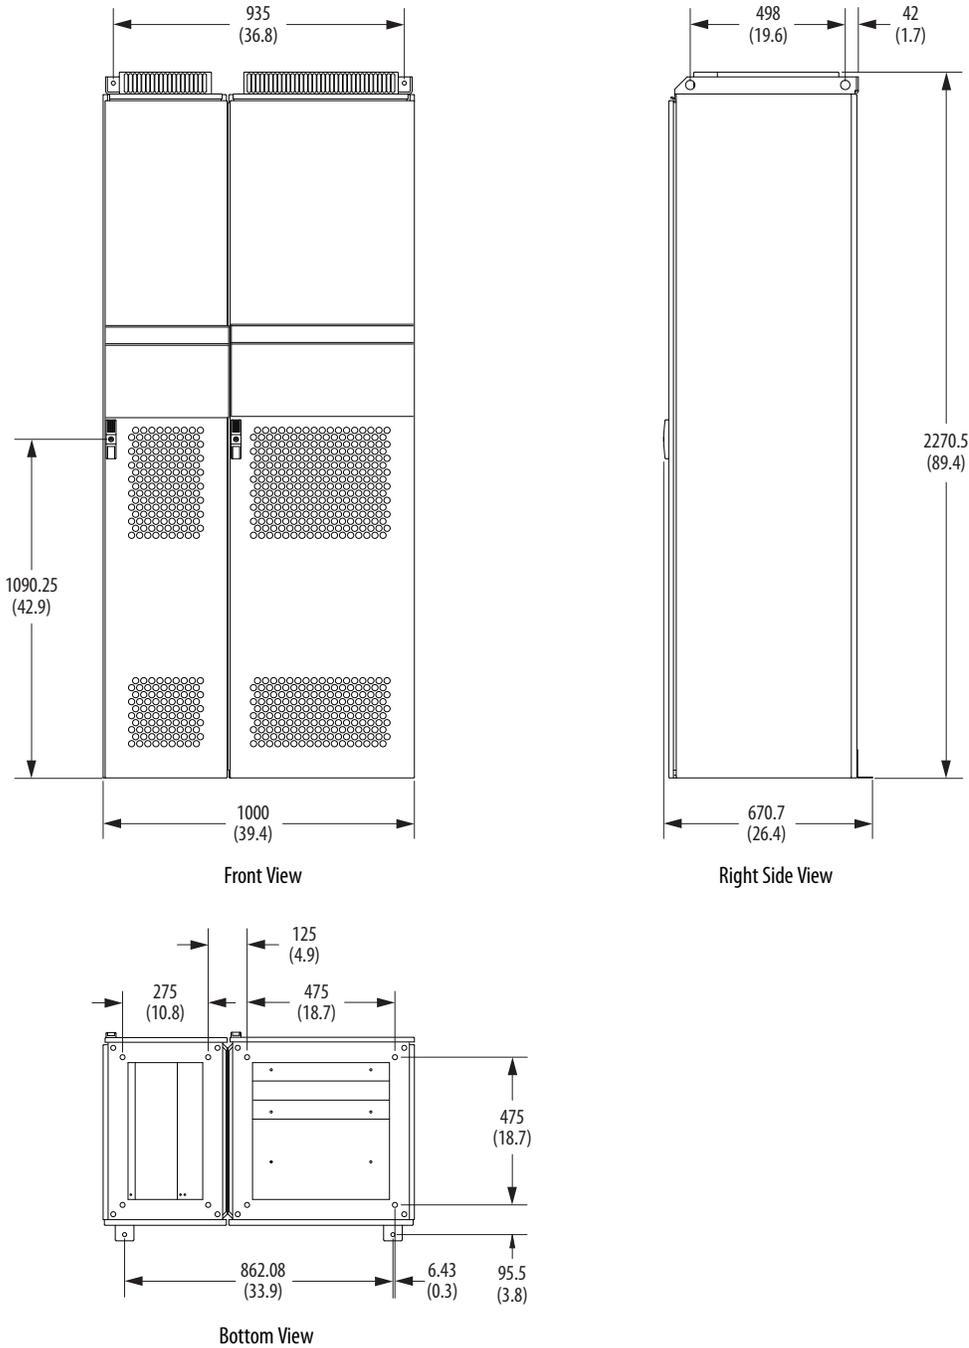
AFE Frame 13 in IP20 2500 MCC Style Enclosure Dimensions
